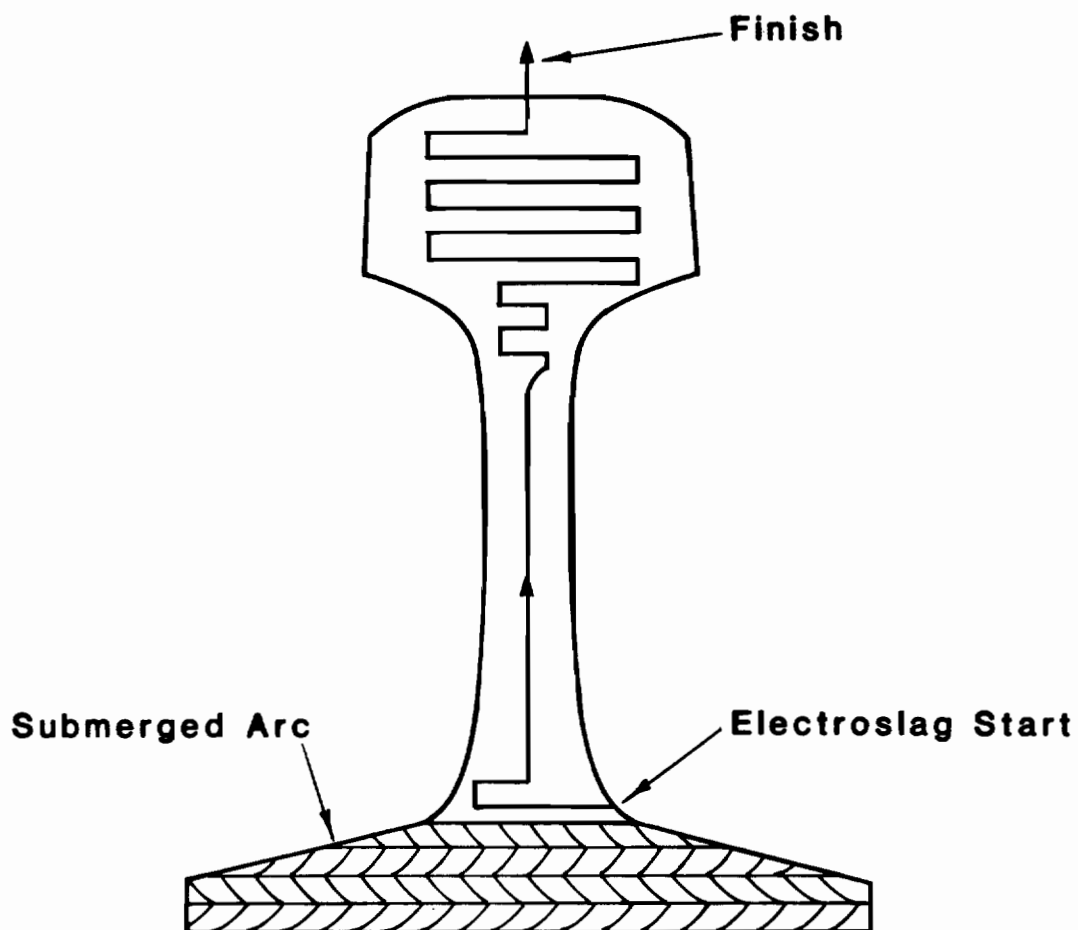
SUBMERGED-SLAG RAIL WELDING SEQUENCE.
